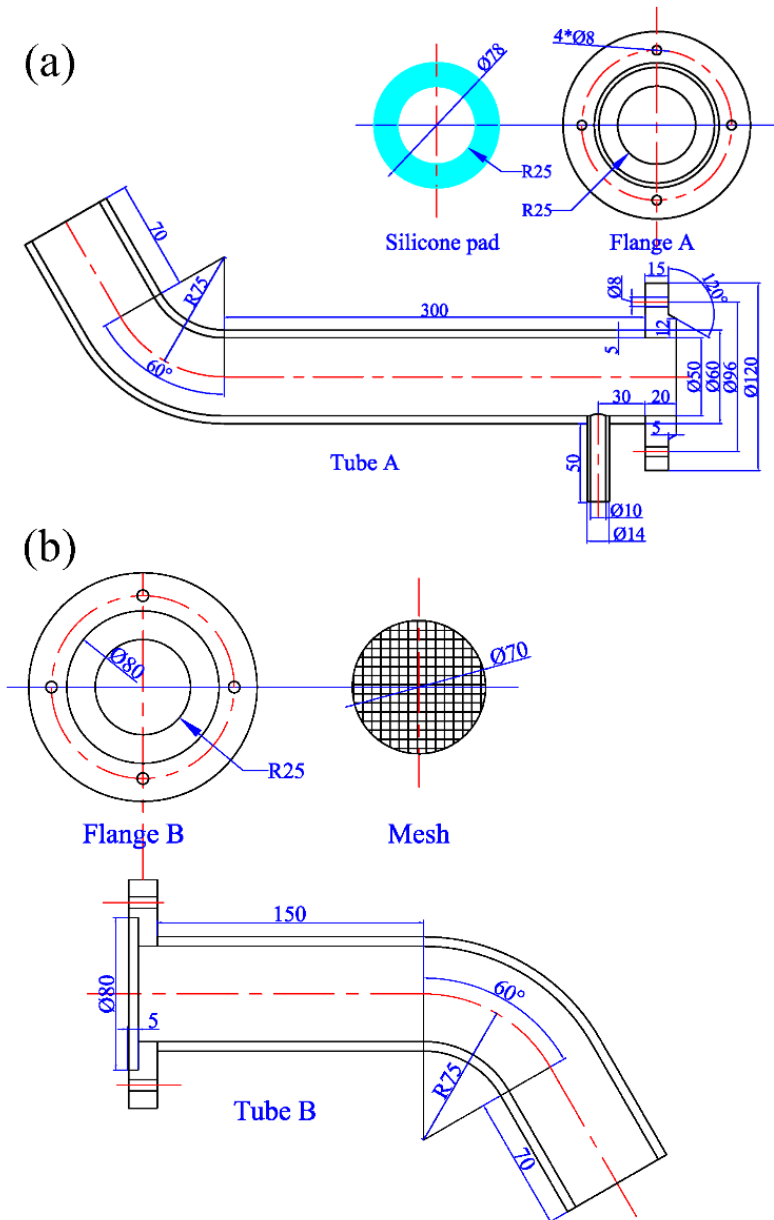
Design details of the home-made oil/water separator. (a) Tube A, silicone pad and flange A; (b) tube B, flange B, and the separating mesh.
